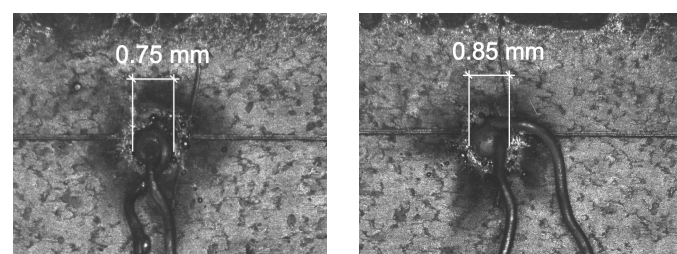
Examples of measuring the diameter of thermocouples used in the recording of thermal cycles of the laser welding process.
